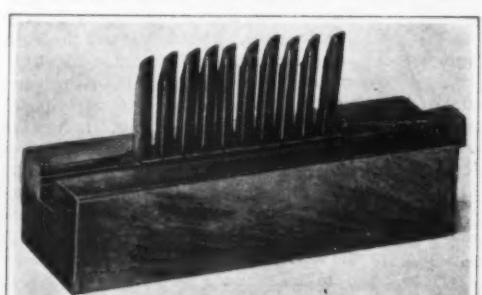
Model of section of rotor groove, showing blades, calking strips and wedges in place.
